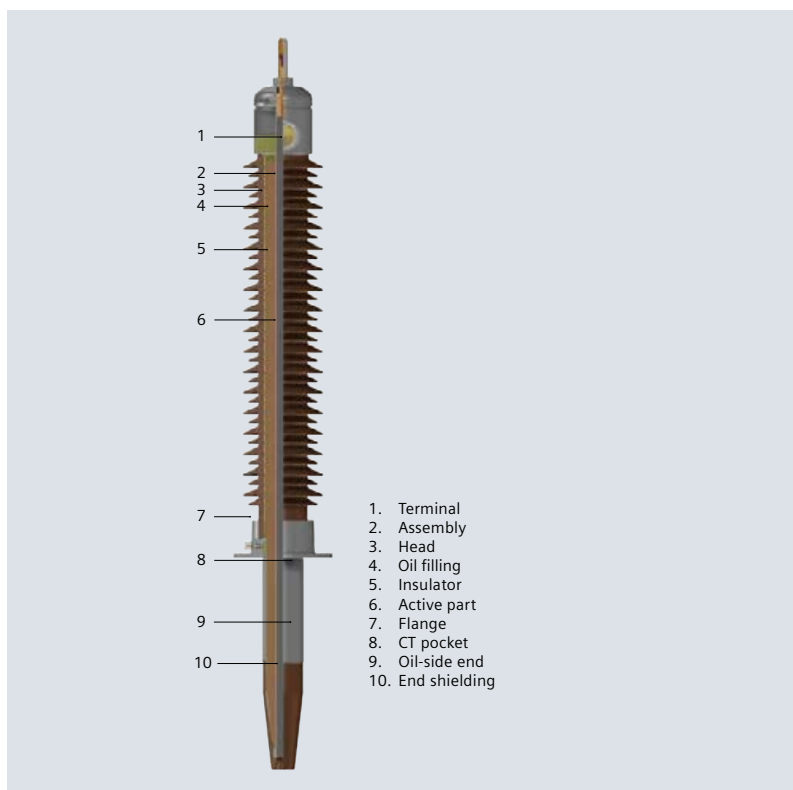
Transformer bushing – oil-impregnated paper (OIP) design – sectional view
